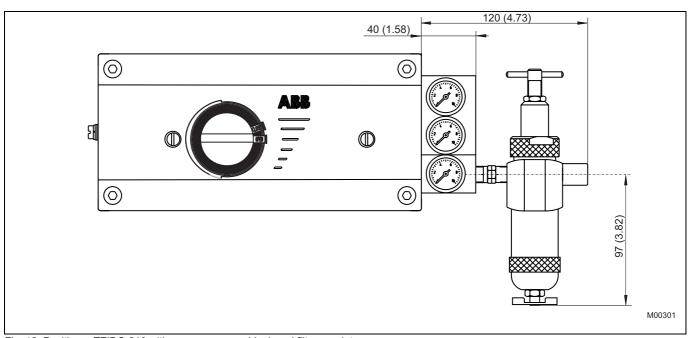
Positioner TZIDC-210 with pressure gauge block and filter regulator
